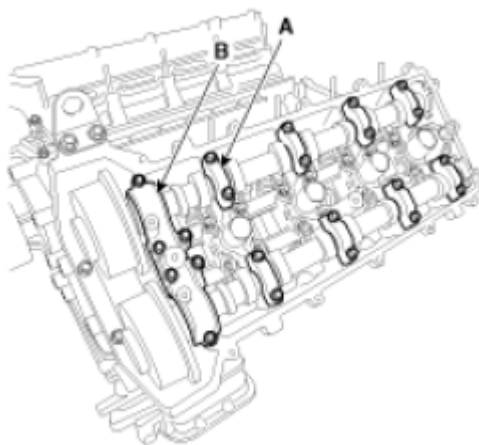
Identifying Camshaft Bearing Caps And Camshaft Thrust Bearing Cap (LH)
